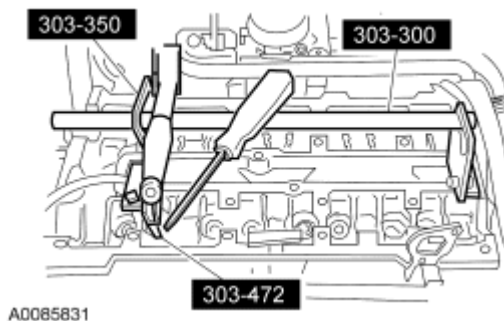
Identifying Special Tools (303-300, 303-350, 303-472)
